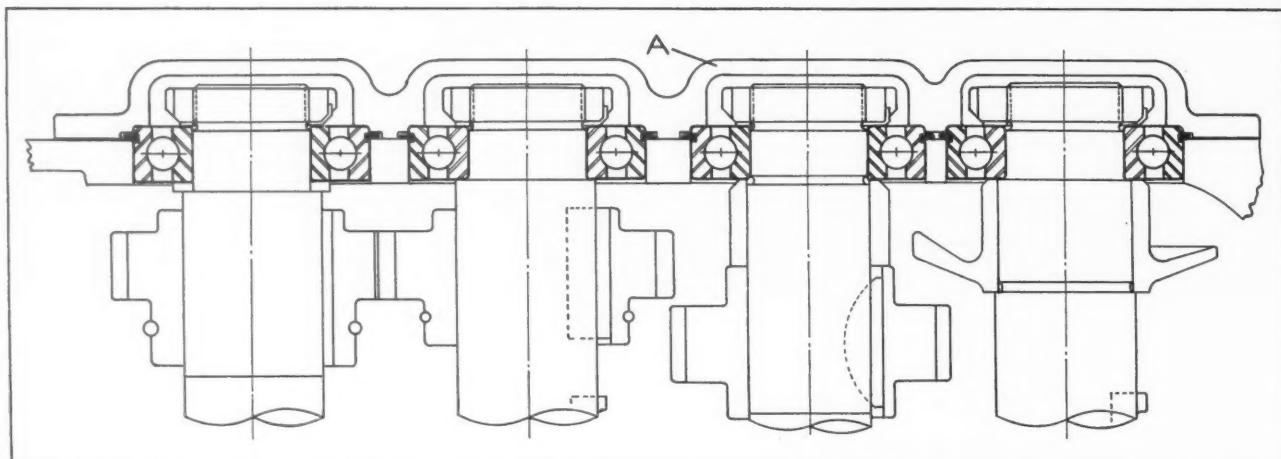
Horizontal Section through a Machine Tool Gear-box Equipped with G Type Bearings
